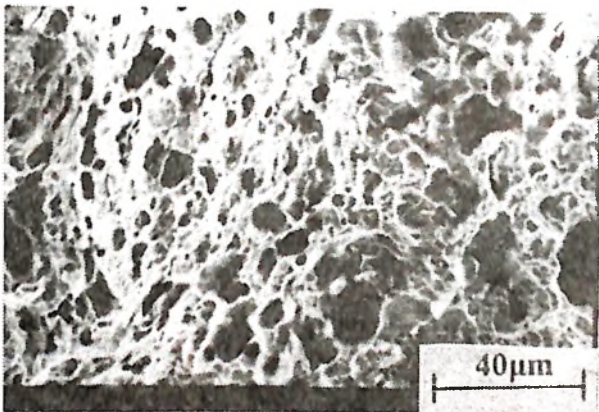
(a) Fracture surface of parent steel (deep & large dimples).
